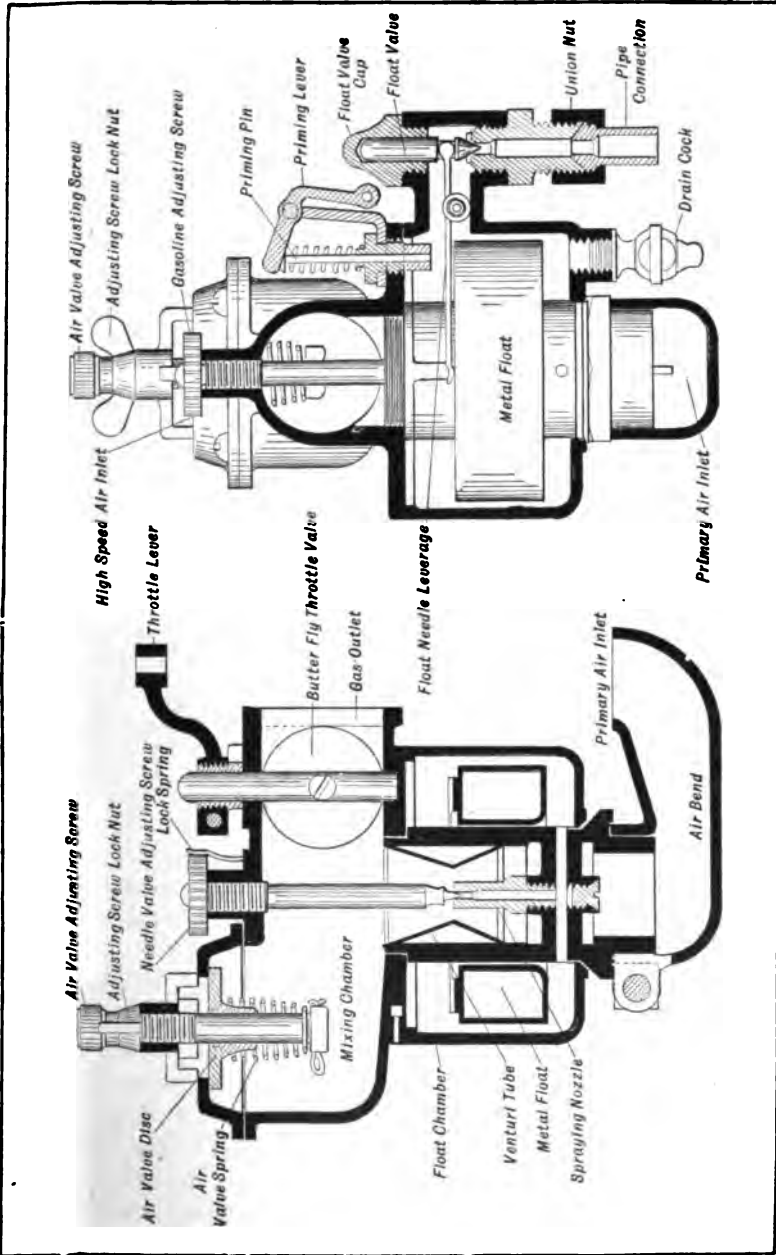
Showing details of Breeze carburetor, a simple automatic instrument. Note fuel adjustment needle valve over spray nozzle.
